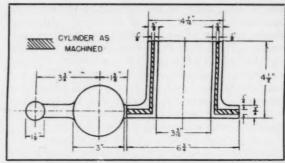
Hydraulic pressure test cylinder casting illustrating gating and machining.
